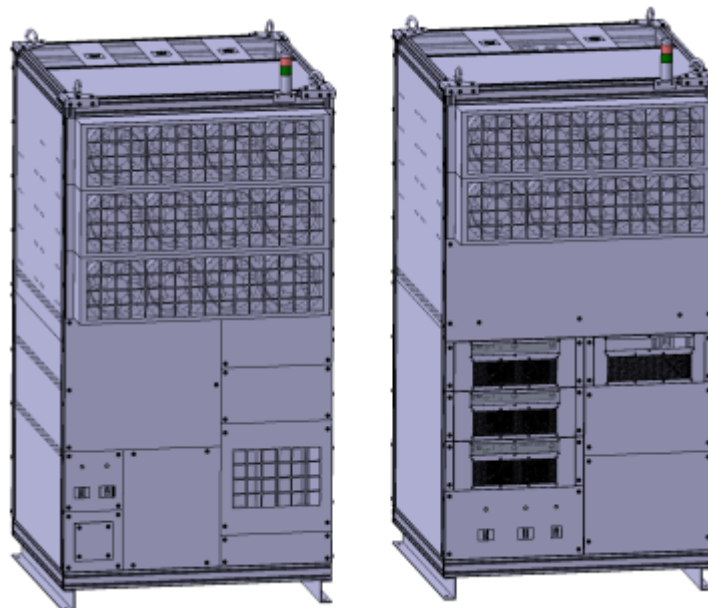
APS switch and APS/BPS cubicle of HVPS system layout at B15-L2 of JA-DA
